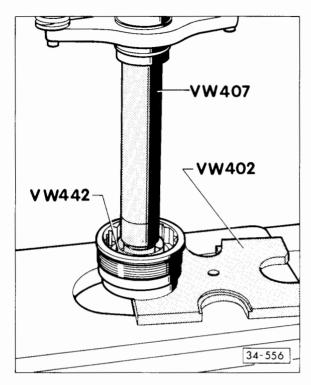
Pressing outer race/tapered roller bearing out of adjusting ring
